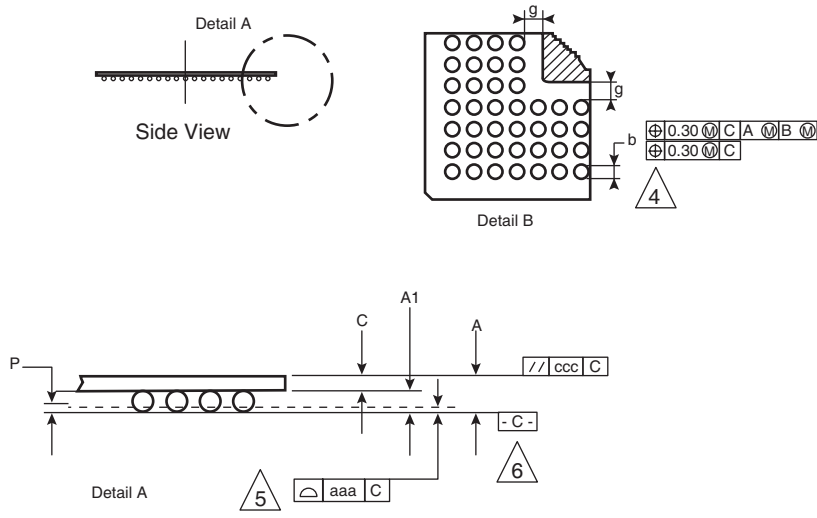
Package Dimension – 240 Tape Ball Grid Array
